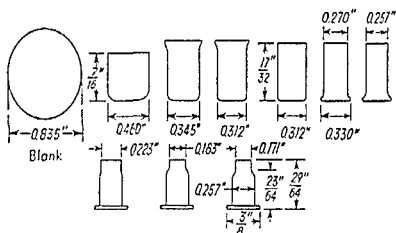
Steps used in producing a necked and flanged shell on an eyelet machine. (Brighton Division, Advance Stamping Co.)
